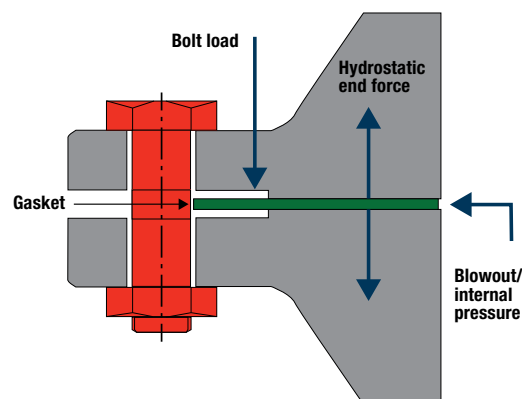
The three main forces at play in a bolted flange joint assembly (shown here) act to prevent leaks and gasket blowouts
